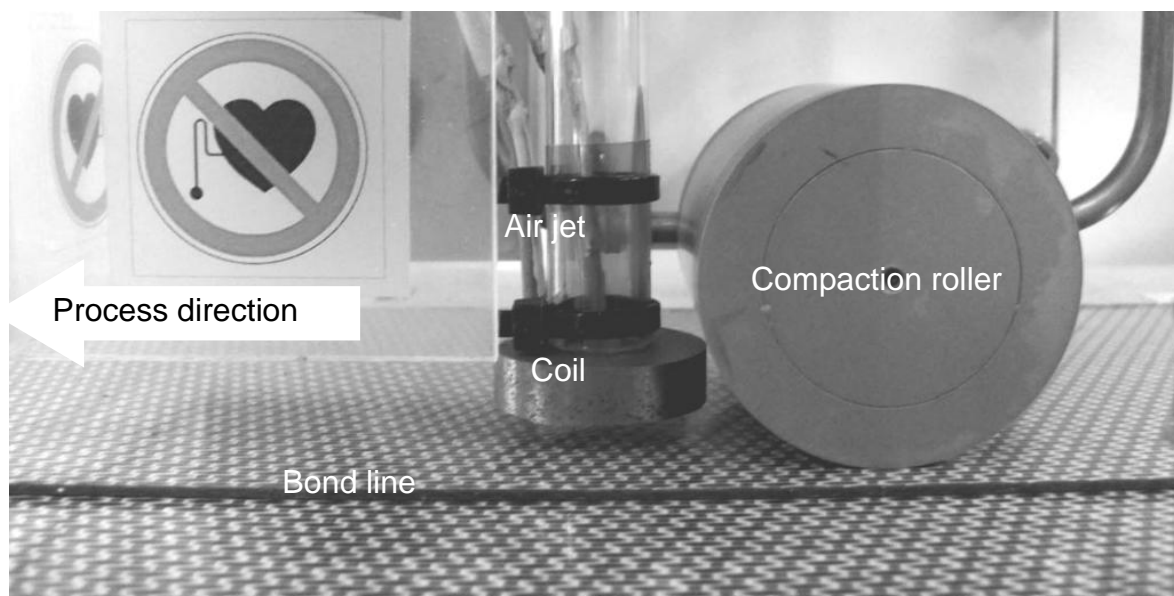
Picture of the induction welding set-up with surface cooling
